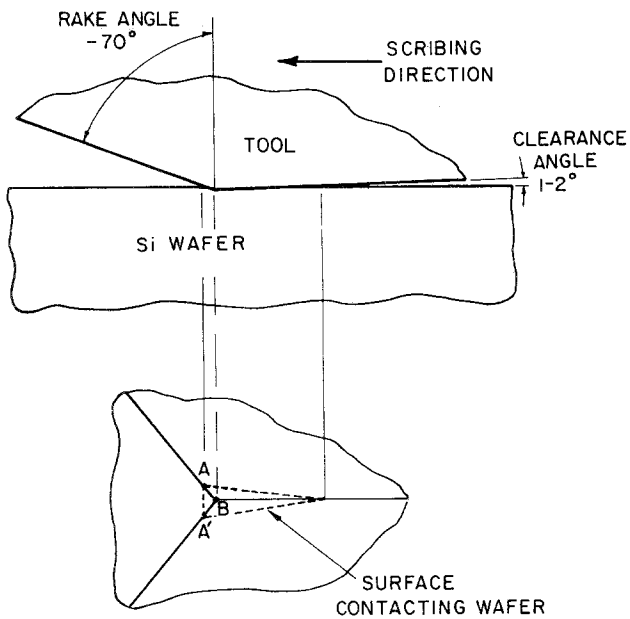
Geometrical details of tool used to scribe silicon wafers.
